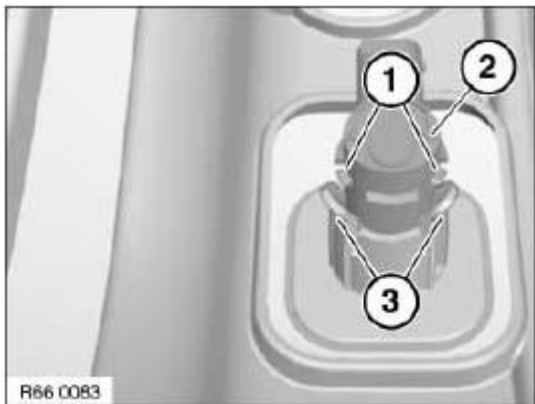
Identifying Hooks, Ultrasonic Transducer And Mountings
